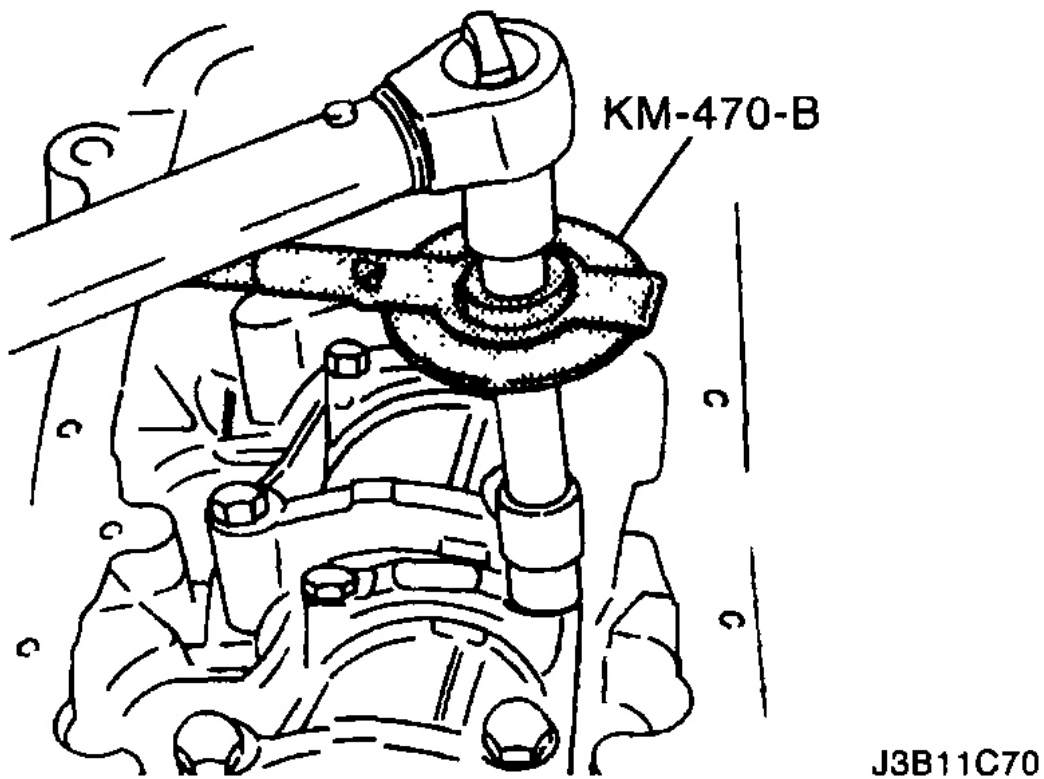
Tightening Connecting Rod Bearing Cap Bolts
